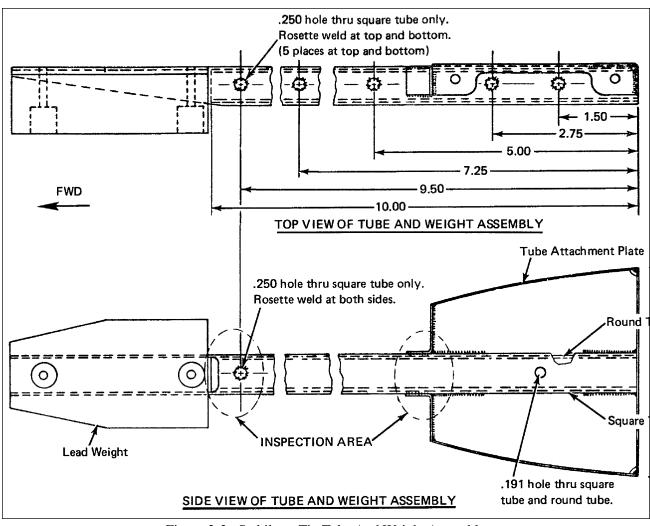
Stabilator Tip Tube And Weight Assembly
